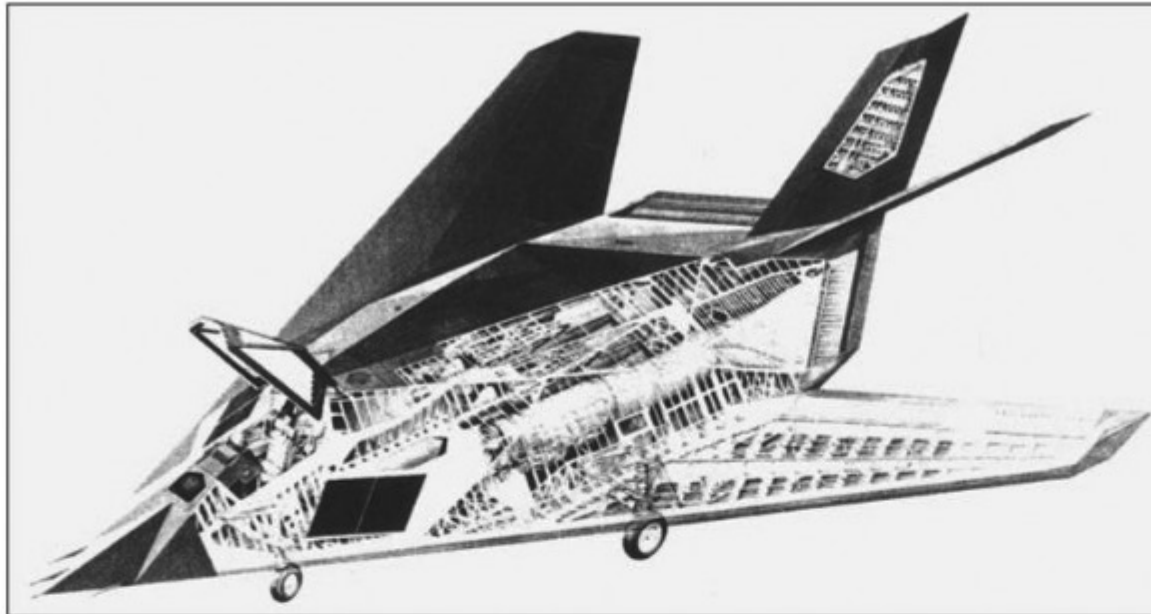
Cutaway view of the Lockheed-Martin F-117A stealth fighter.
